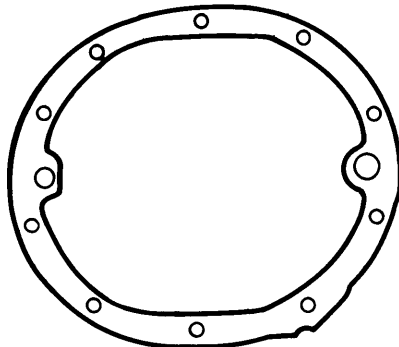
8 1/2" & 8 7/8" Ring Gear Gasket for Identification Purposes
